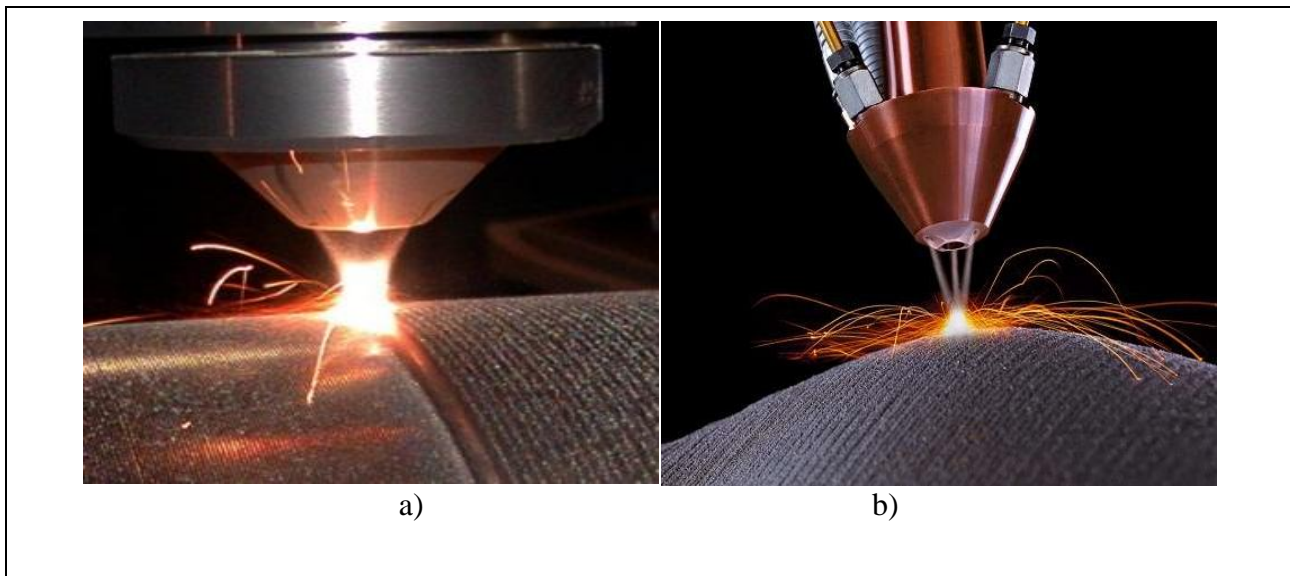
Laser cladding a) Laser welding solutions, b) Laser focus world.
